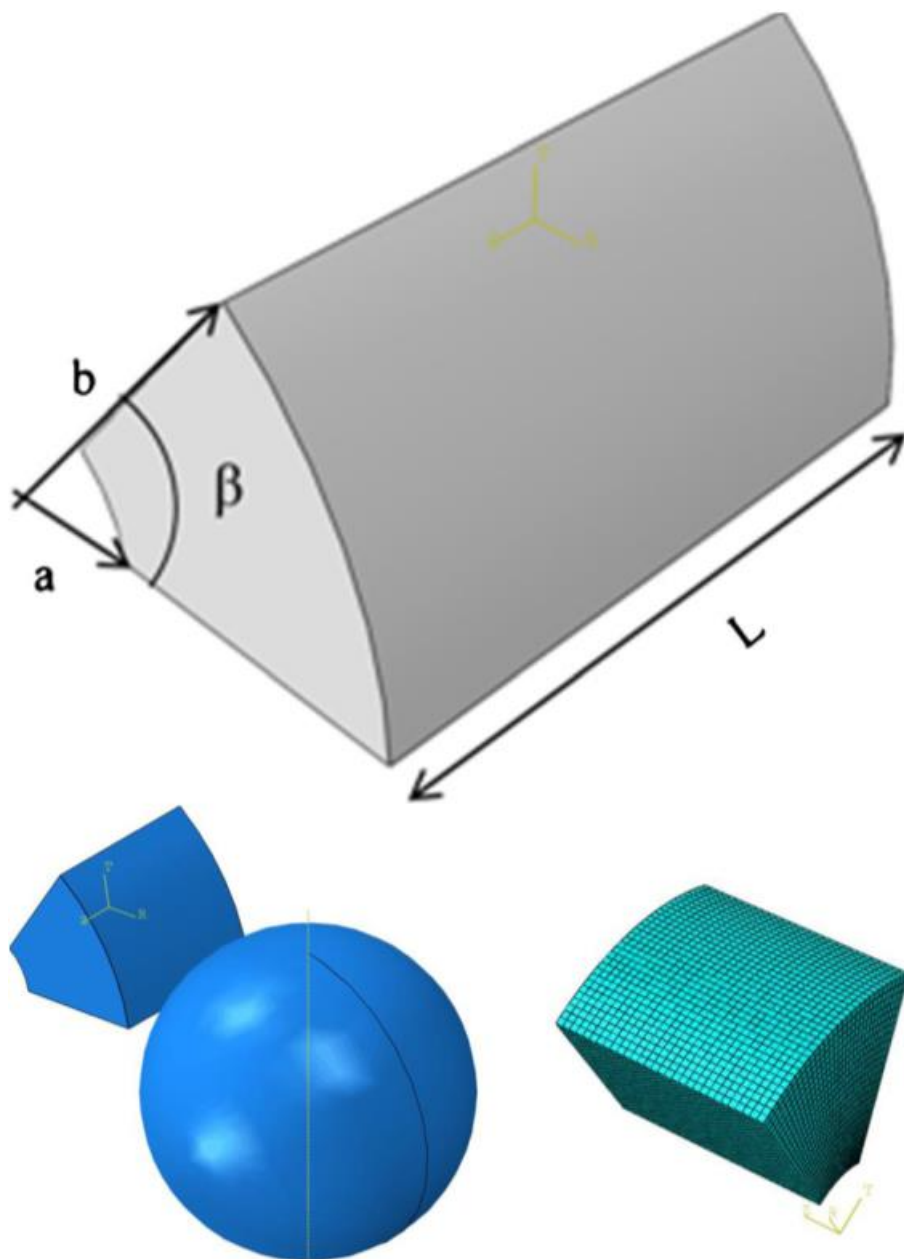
Geometry specimen, Rolling Tool and Mesh View [38]
